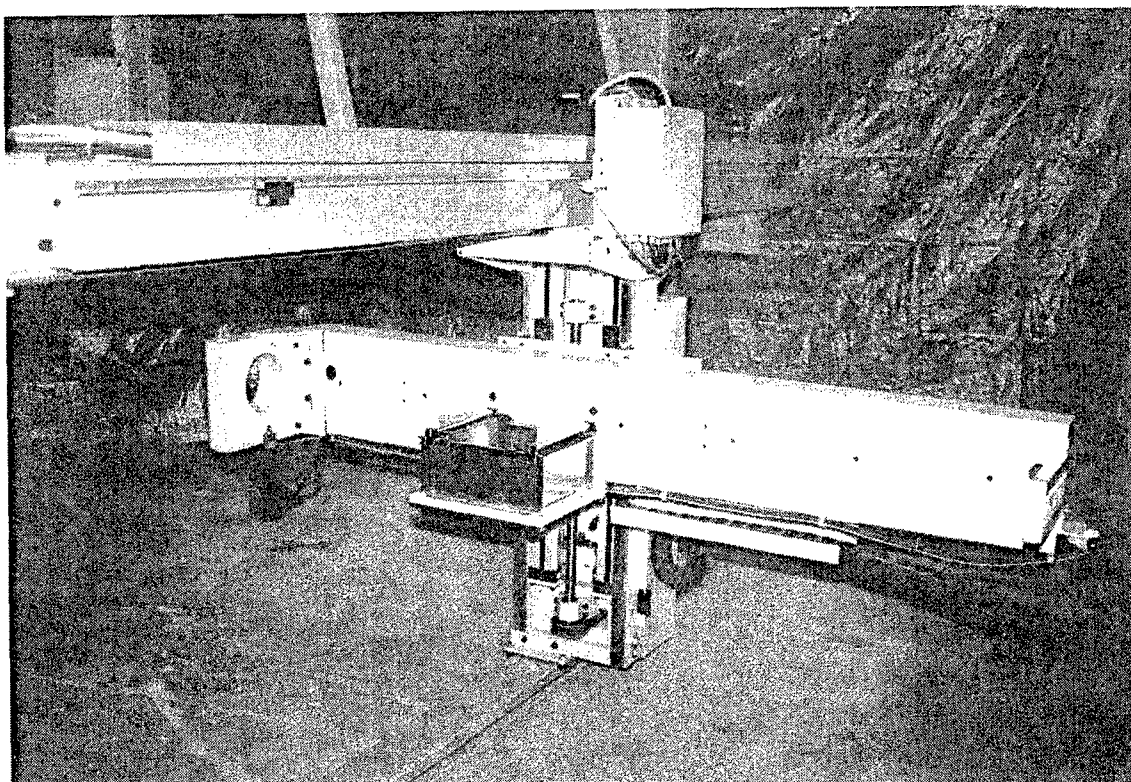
SIDE VIEW OF CARRIAGE ASSEMBLY
